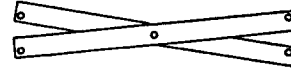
SIZZOR ARMS INSTALLATION - CM1432
